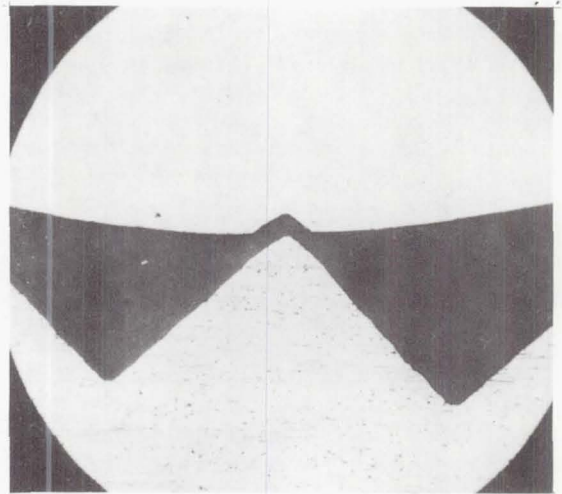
Magnified Cross-section of Explosive formed Permanent Joint
